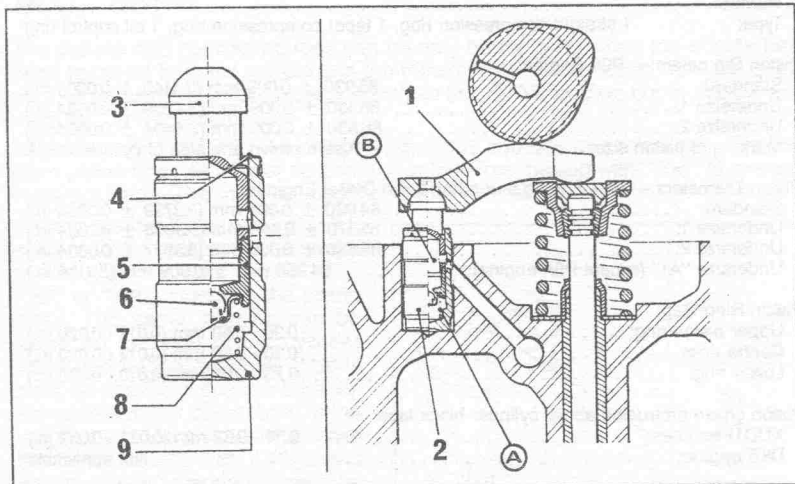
Sectional view of a hydraulic tappet and the rocker mechanism. The numbers and letters are referred to in the text.
